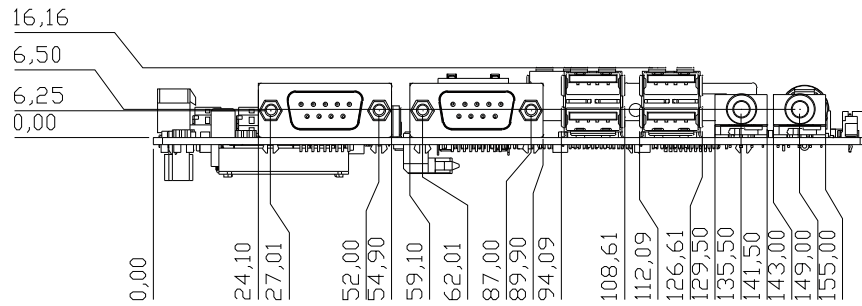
MIOe-DB2000 Mechanical Drawing (Bottom Side, with optional DC Jack)
